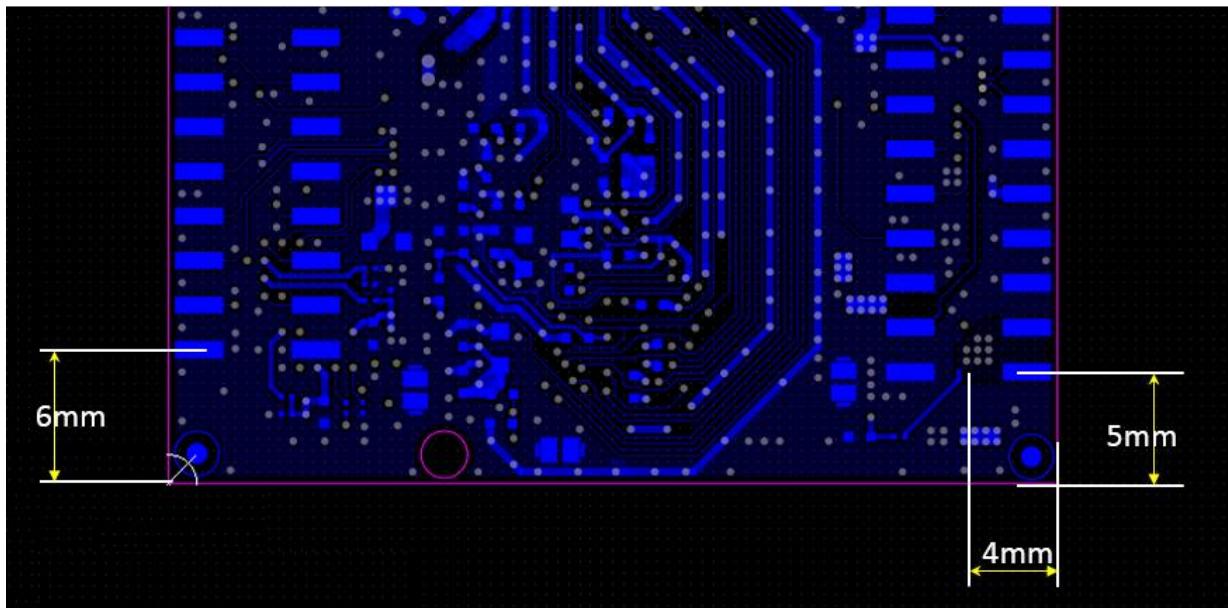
LS10 Top View - Mechanical Dimension 2
